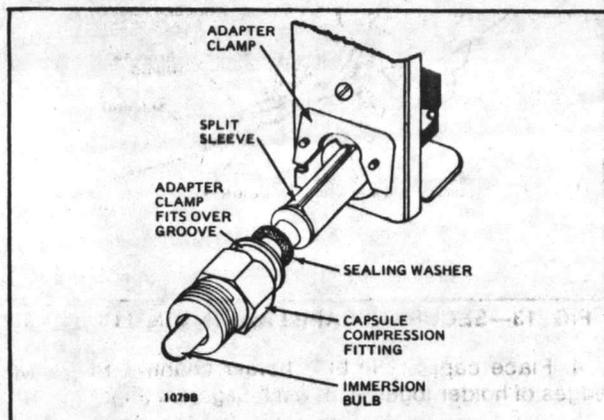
DIRECT IMMERSION MODEL WITH FITTING PARTIALLY REMOVED.
